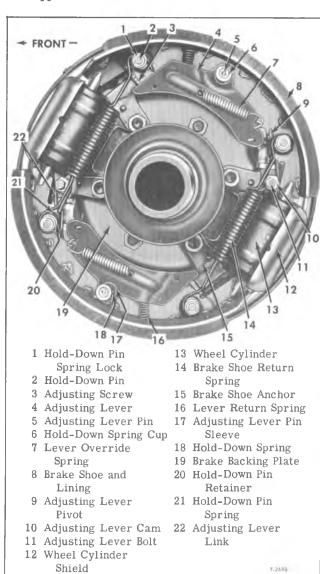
Twin-Action Rear Brake Assembly (Automatic Adjuster)
